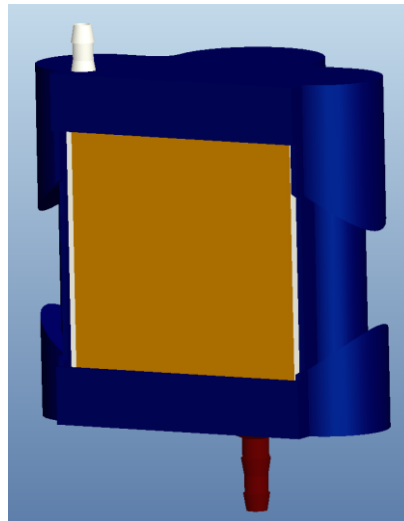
ProEngineer model showing a rear view of the complete concept 2 design with casing.
